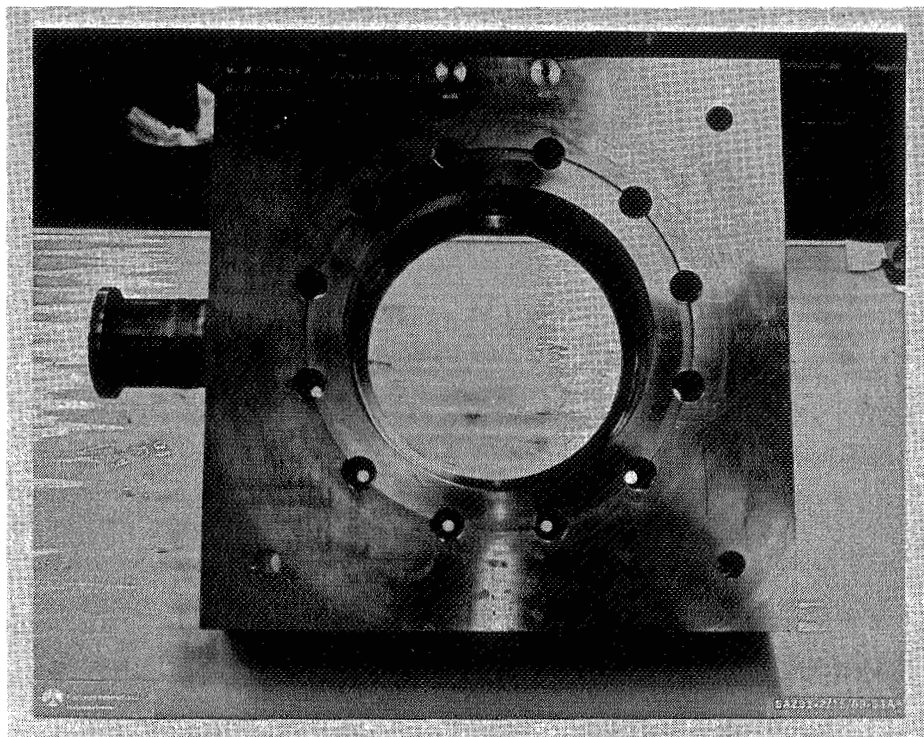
Fuel Manifold, 5.7-Inch Combustor
